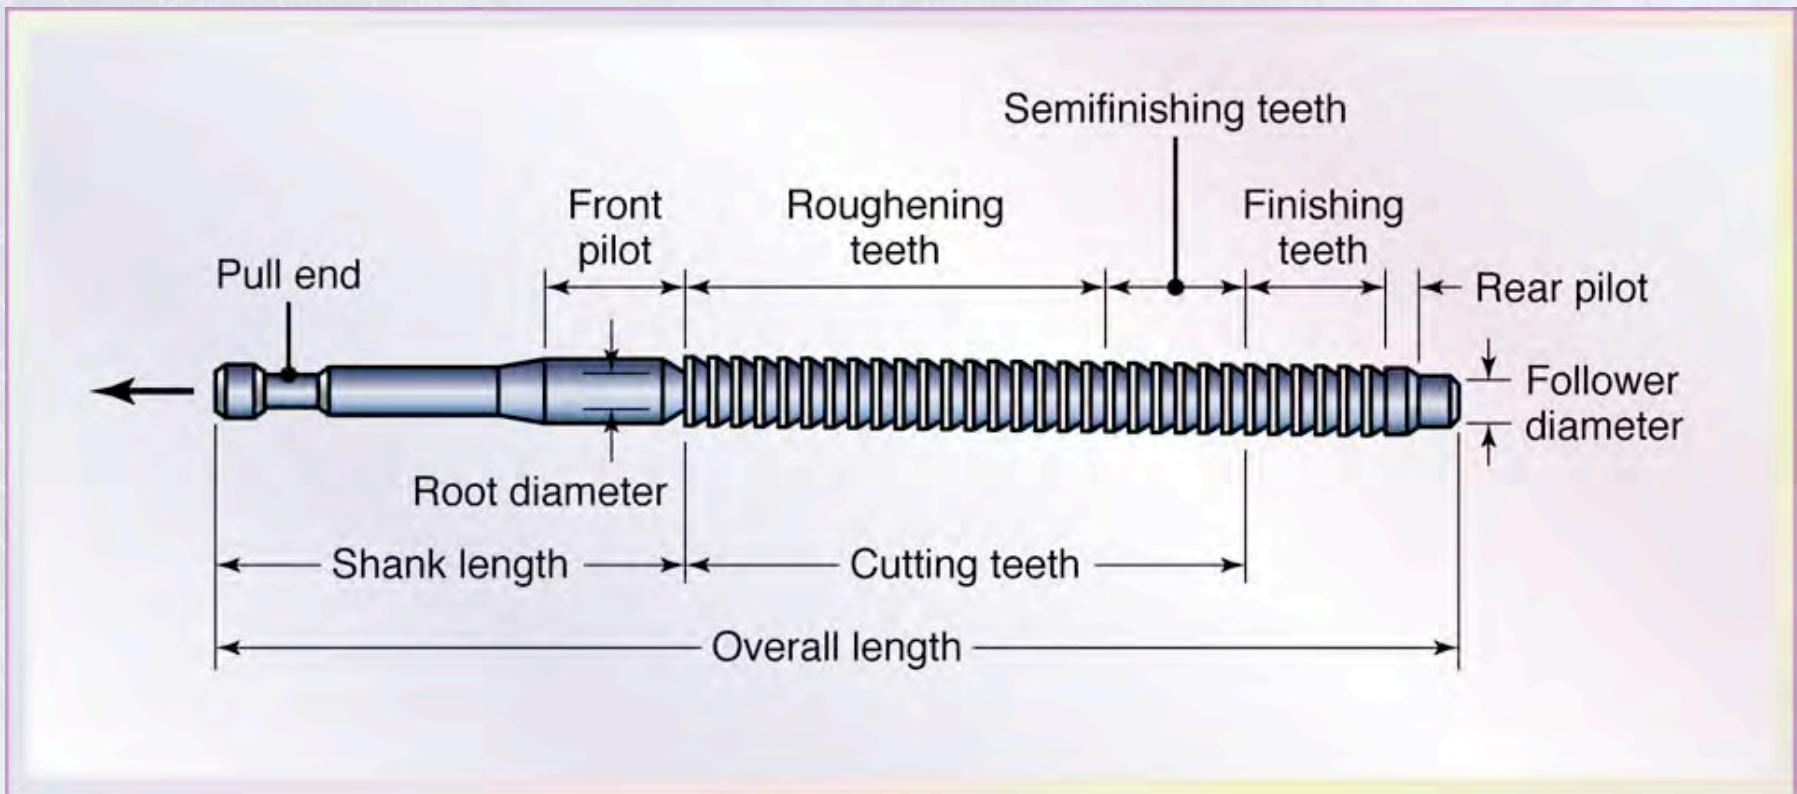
Terminology for a pull-type internal broach used for enlarging long holes.
